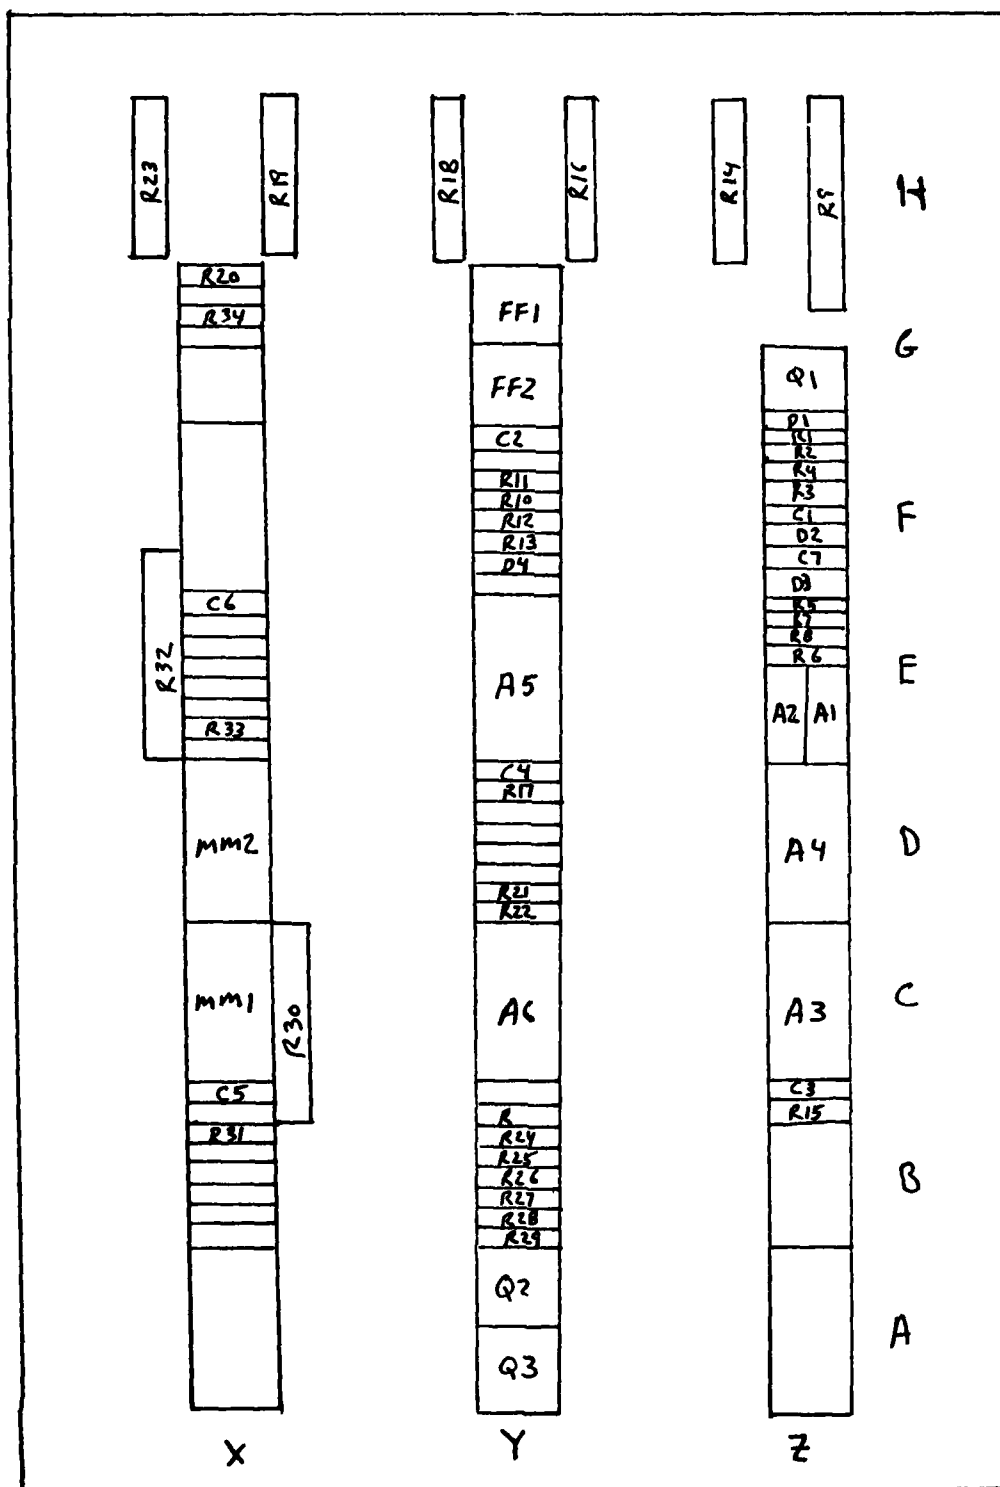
Pattern Generator Circuit Layout Wiring Side
